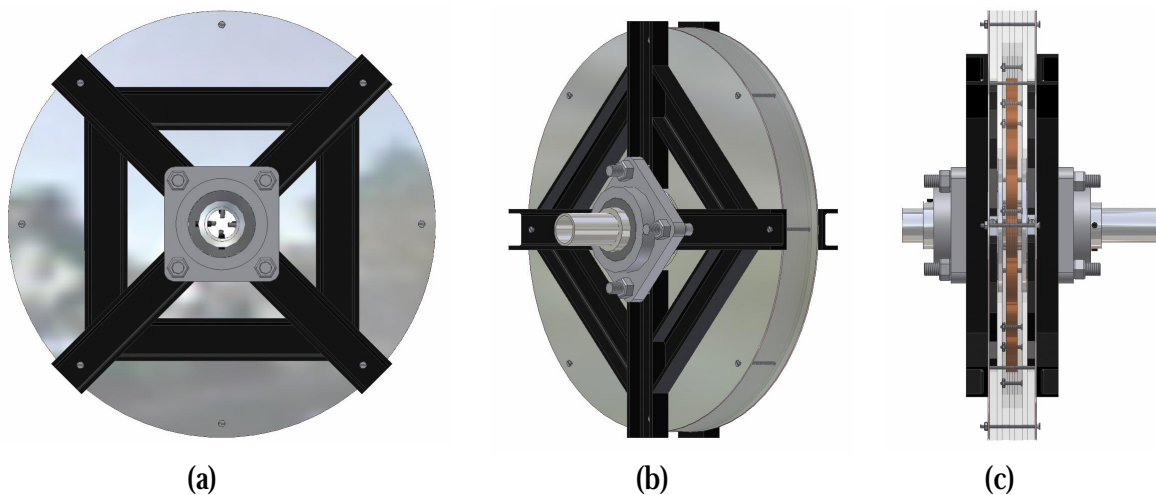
Low “rpm” Permanent Magnet Generator. Welded channel iron provides support for the rotor (a) and screws are used to hold the rotor parts together (b). The stator, housed inside the rotor (c), contains coils through which a current is induced as the rotor turns.
